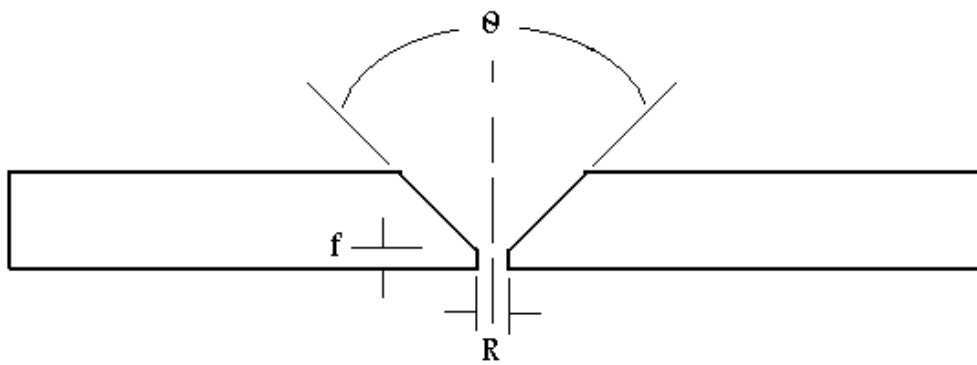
Complete joint penetration (CJP) Single-V-Groove butt joint details according to AWS
